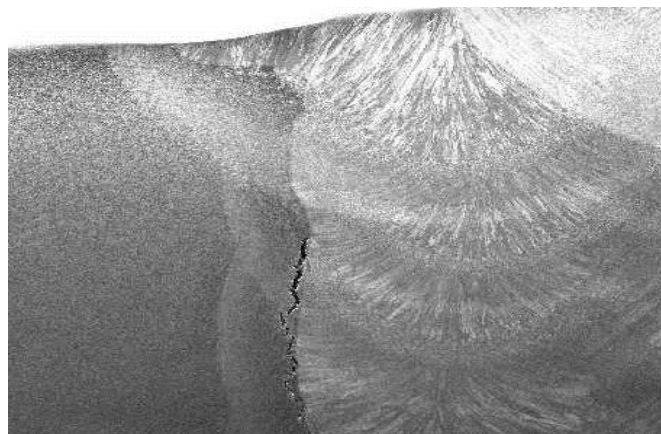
Hydrogen induced cracking in a weld joint
